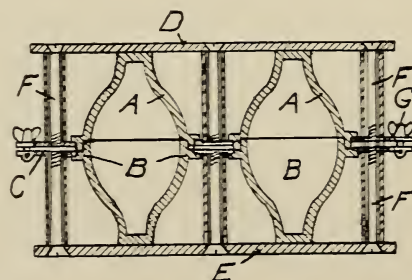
THE EGGERS QUICK CURING MOLD WITH OPEN WROUGHT IRON FRAME.
